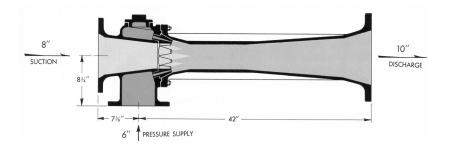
Garbage pump. Peripheral arrangement of jets helps minimize plugging. (Courtesy Derbyshire Machine & Tool, Inc.)
